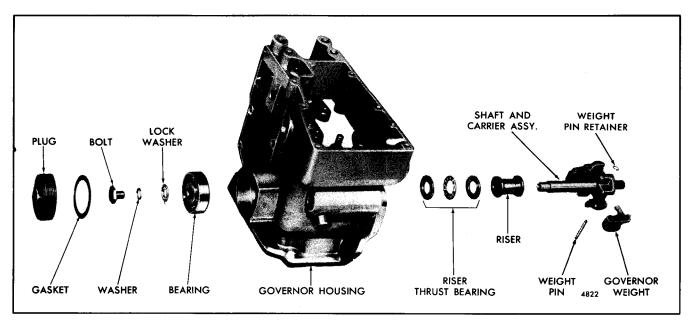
Governor Housing and Weight Details and Relative Location of Parts
